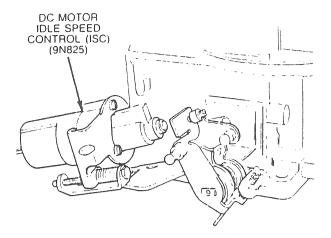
ISC motor. (Courtesy of Ford Motor Co.)
